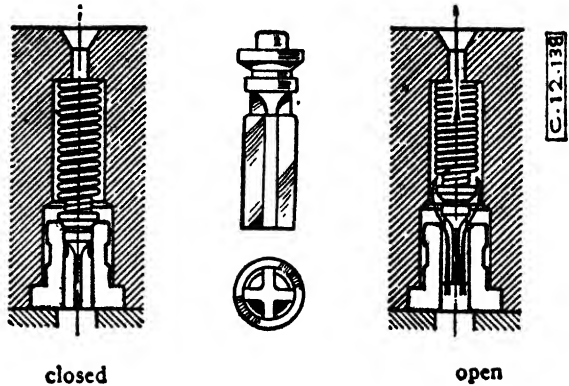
C.A.V. INJECTION PUMP DELIVERY VALVE
